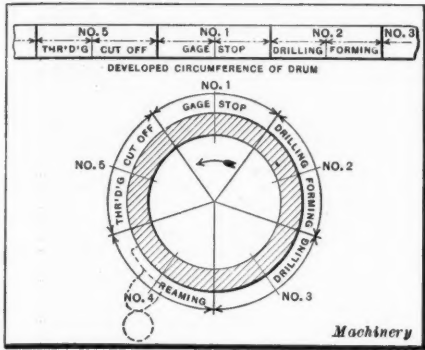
Divisions on Controller Drum, showing Positions of Tools and Cross-section through Drum
